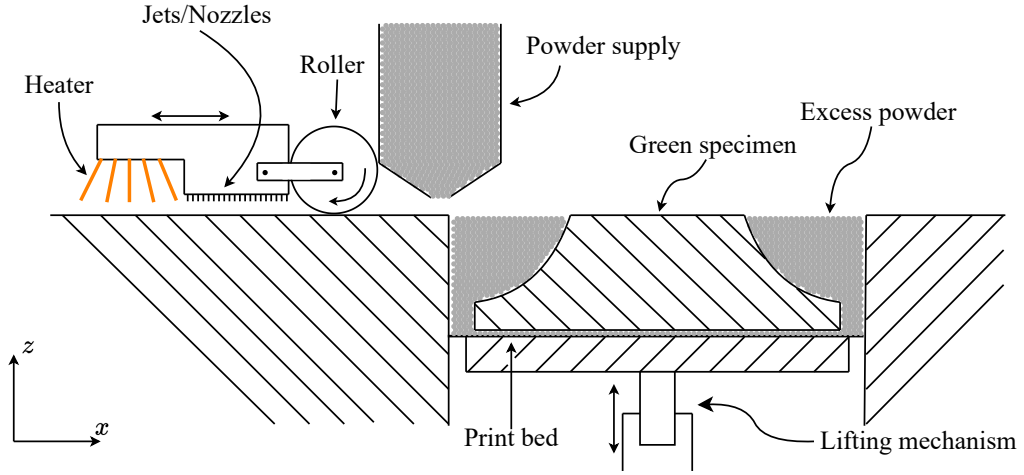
A sketch of the primary internal components in a MBJ 3D printer
